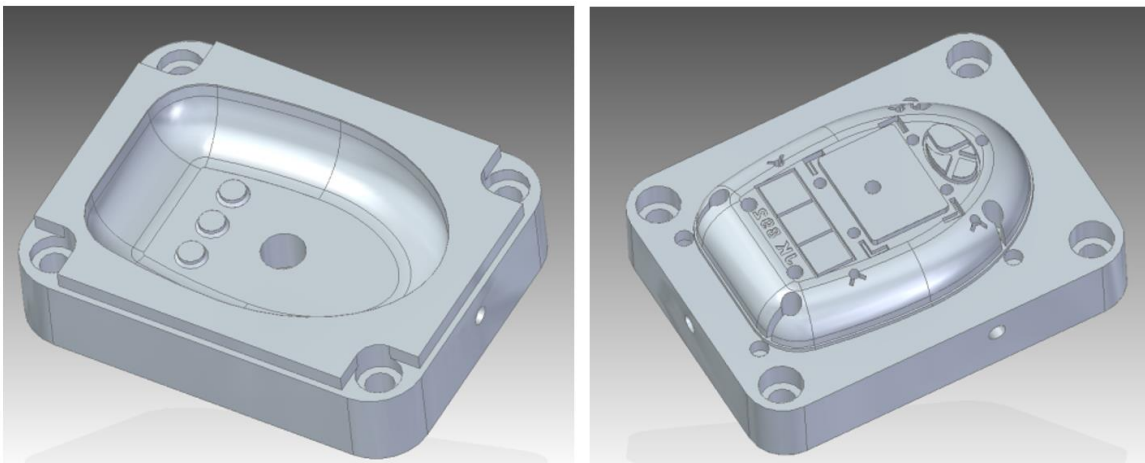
CAD models of the Alumide® inserts consisting of a single part cavity.
